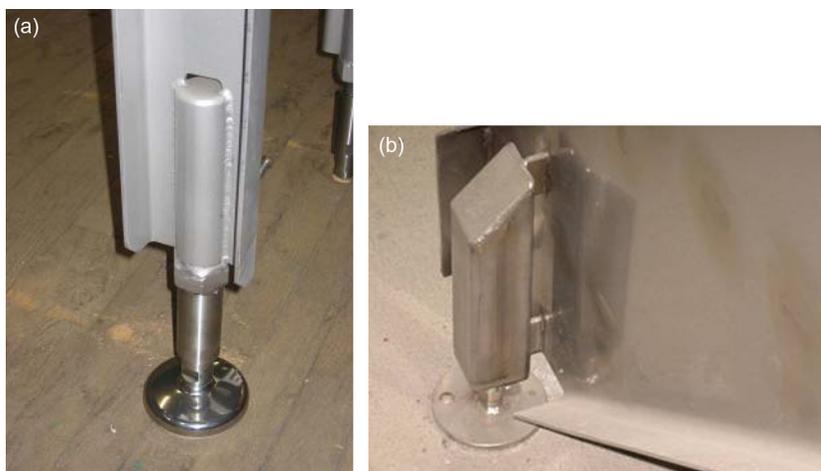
(a) Pivotal machine leveling mount from which the threaded spindle is completely concealed in a closed pipe that is in-welded in a sheet metal leg. (b) Stair riser legs, totally sealed, with sloped top and set off the riser. (a) courtesy of Den Rustfri Stålindustris Kompetencecenter. (b) courtesy of Joe Stout.
